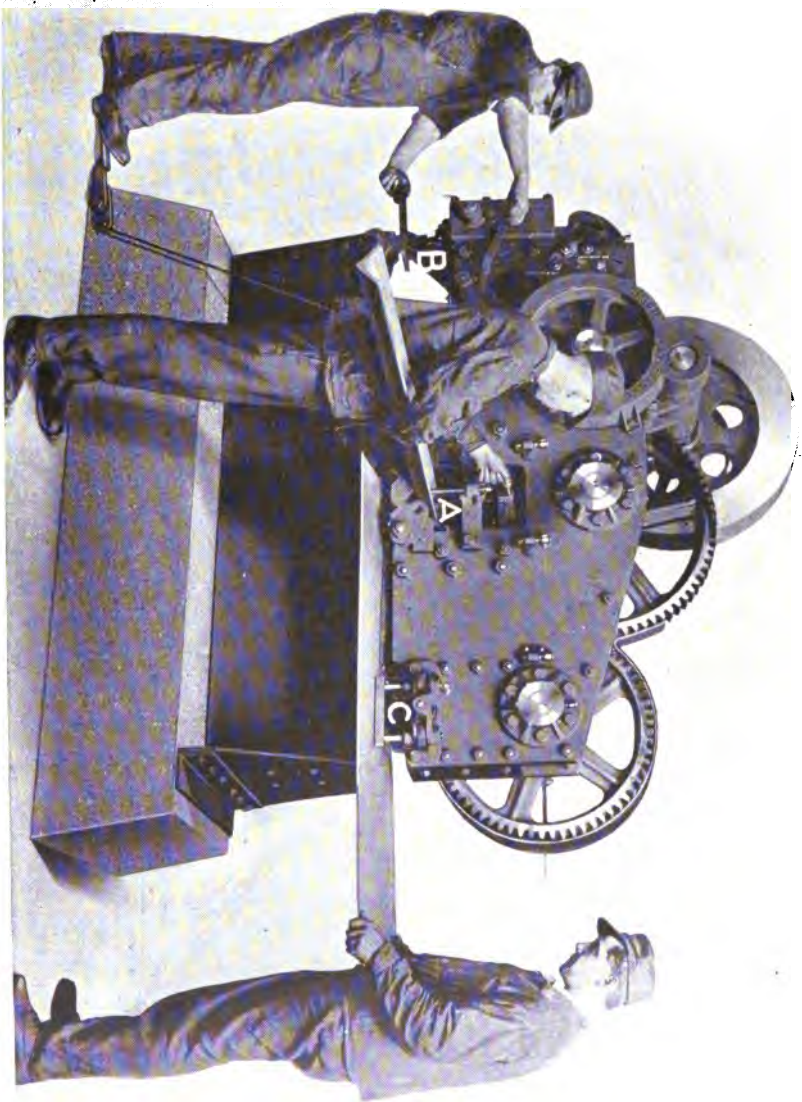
PLATE XLVIII.—Illustrating work done in a "fabricating" shop. A, cutting off angle bar; B, punching holes in plate; C, cutting or shearing plate.
